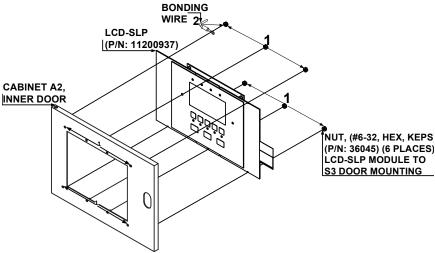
E3 Series Cabinet A2, Sub-Assembly to the Inner Door Installation
